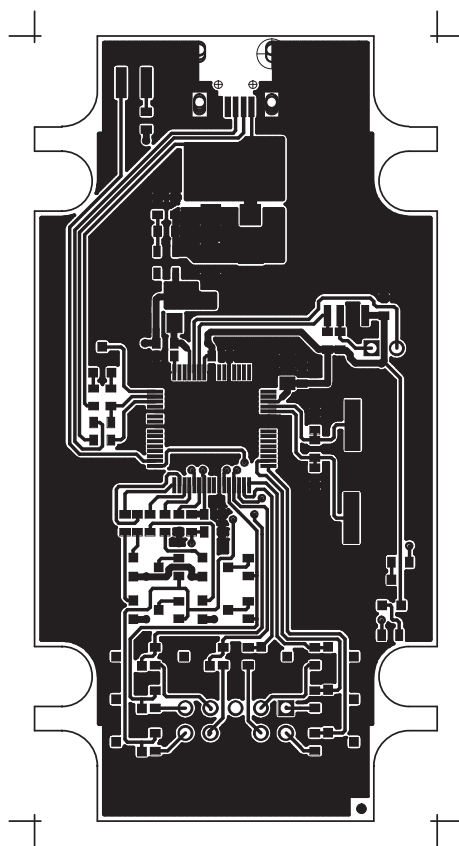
PCB Layout — Top L1 (Copper Layer)
